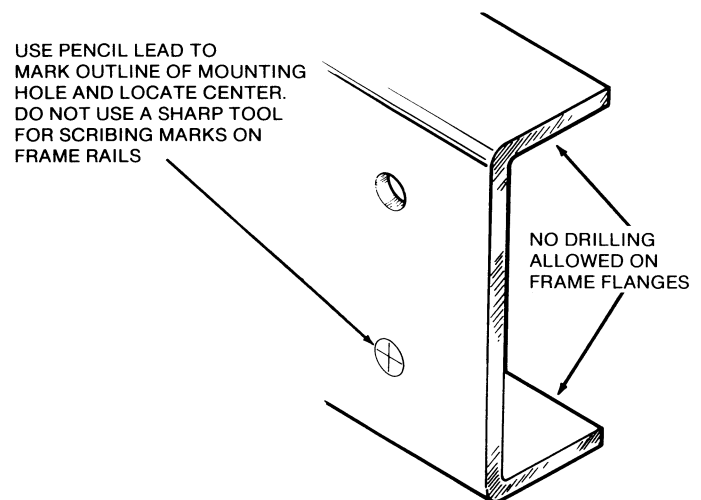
MARKING MOUNTING HOLE LOCATION ON TRUCK FRAME RAIL-SIDE MOUNT ONLY
